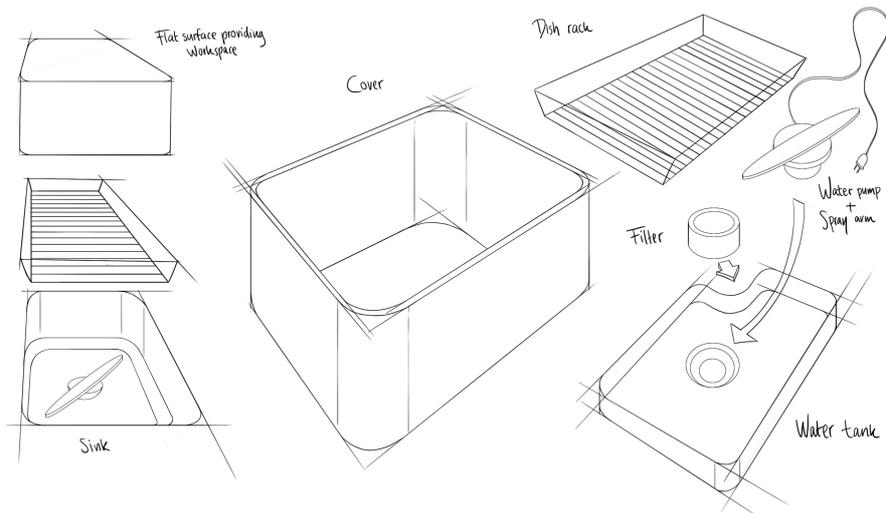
Sketches of the sink dishwasher utilizing the sink walls with components that can be disassembled
